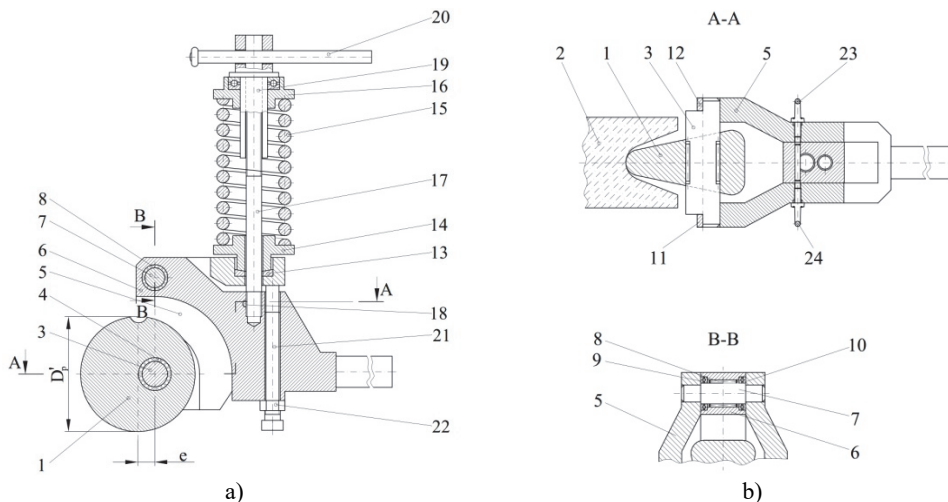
The device for reeling rope blocks with a wedge roller: roller (1); reeled part (2); shaft (3, 7); bearings (4, 8, 9, 10); lever (5); bracket (6); plates (11, 12); spherical washer (13); sleeve (14); spring (15); sleeve (16); pulling rod (17); pin (18); nuts (19, 22); handle (20); screw (21); eye bolts (23, 24)
